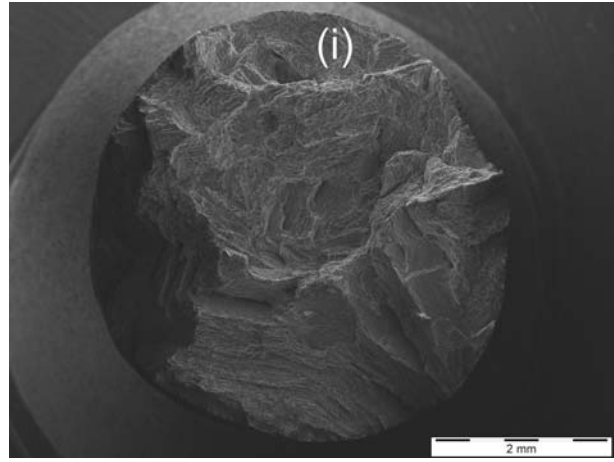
Optical macrographs showing the surface condition of SSRT tested specimens in ASTM D1384 solution
